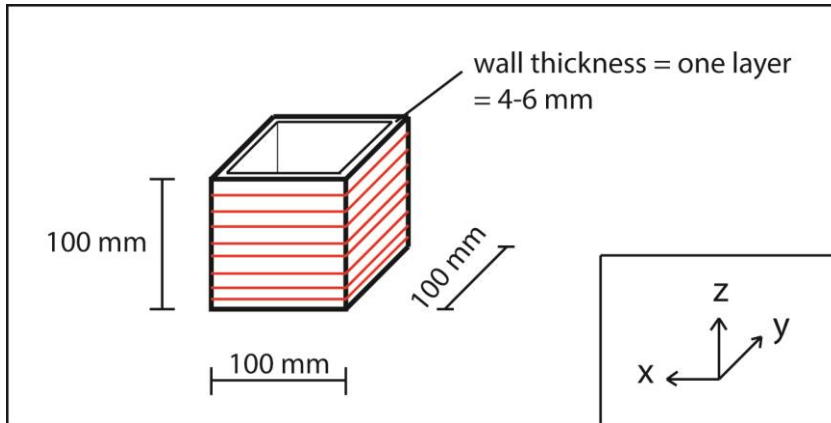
Compressive and buckling test specimen as they came out of the printer
